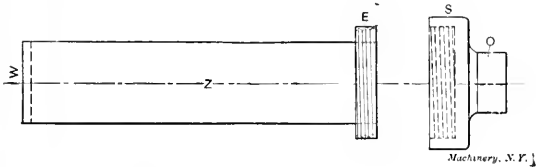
Annealing Pipe with Welded Collar.
